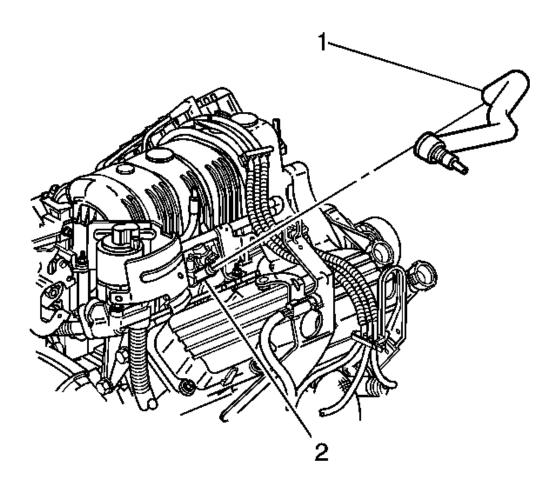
Brake Booster Hose & Vacuum Source Manifold Courtesy of GENERAL MOTORS CORP.
